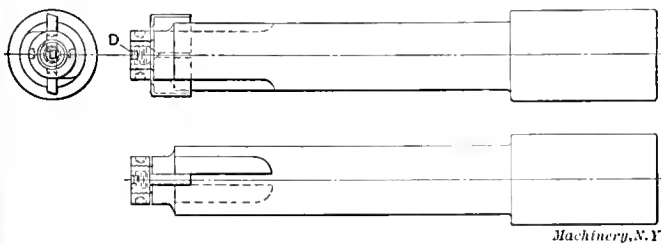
Bar with Cutter Adjustment, but of Simpler Construction than the One shown in Fig. 1.
